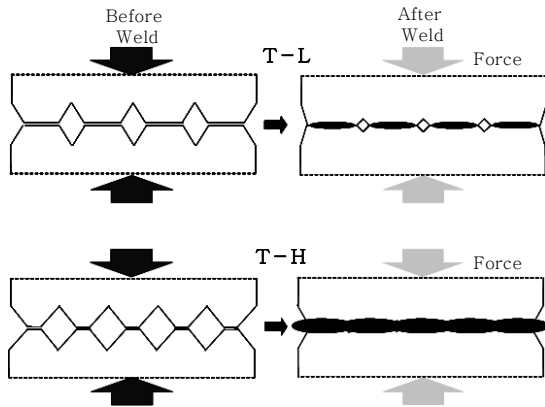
Schematic drawings of comparison in fusion zone between T-L and T-H steel sheets with same welding conditions
